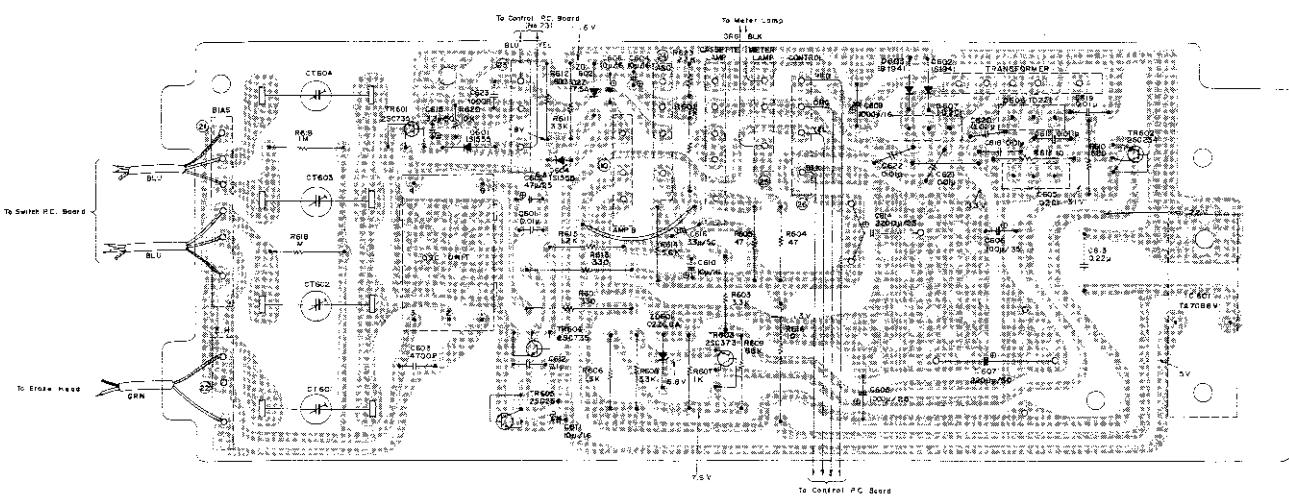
Bottom View of Power Supply P.C. Board, PC-006
